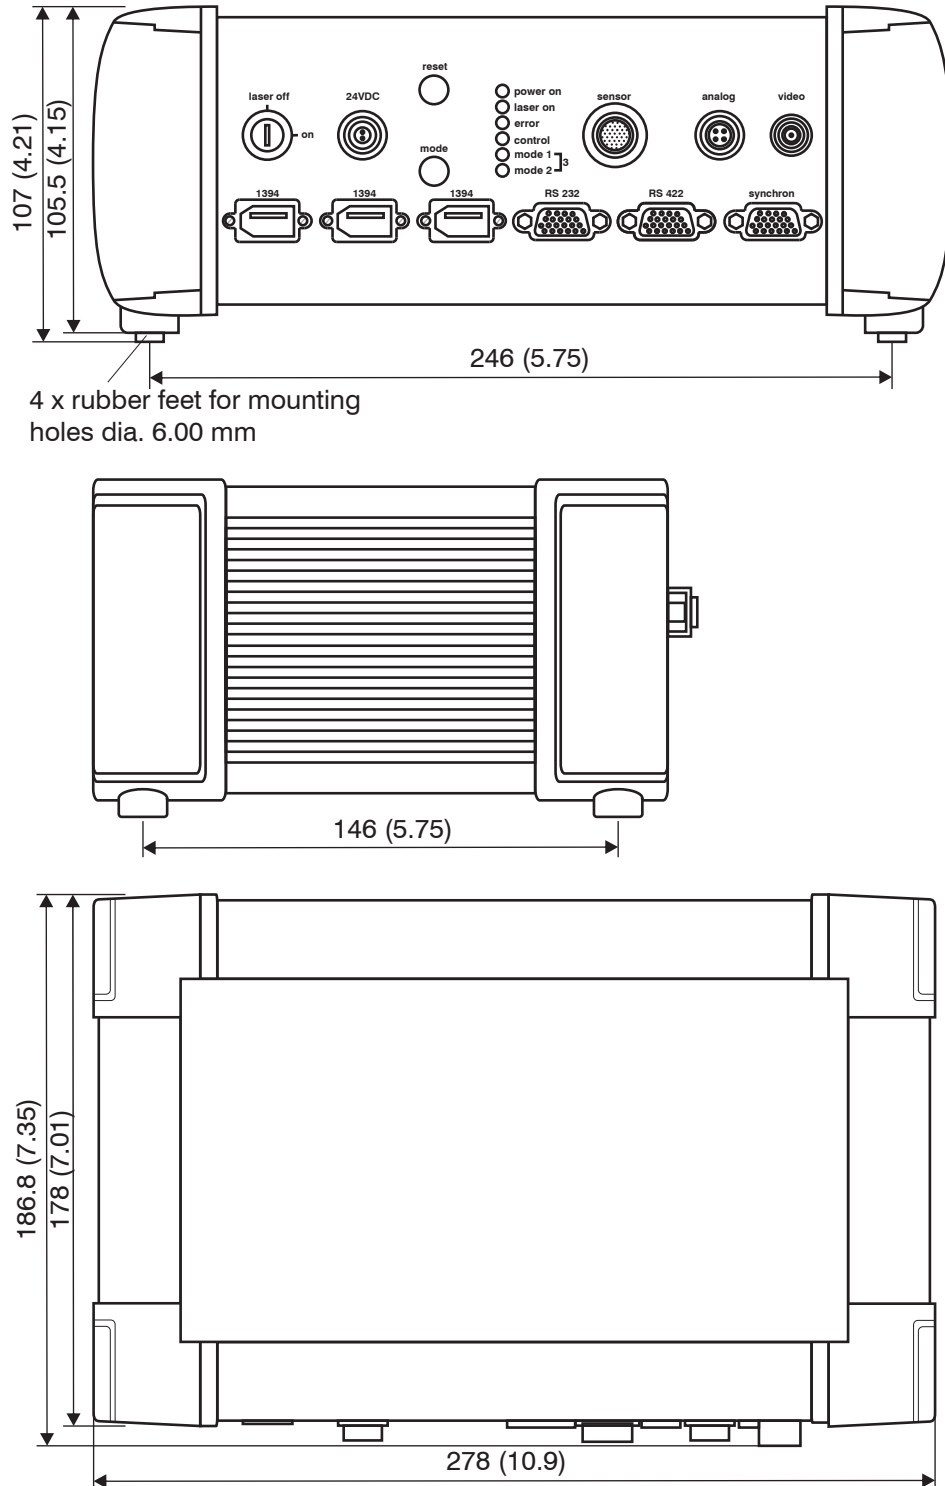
Dimensional drawing controller scanCONTROL28x0
